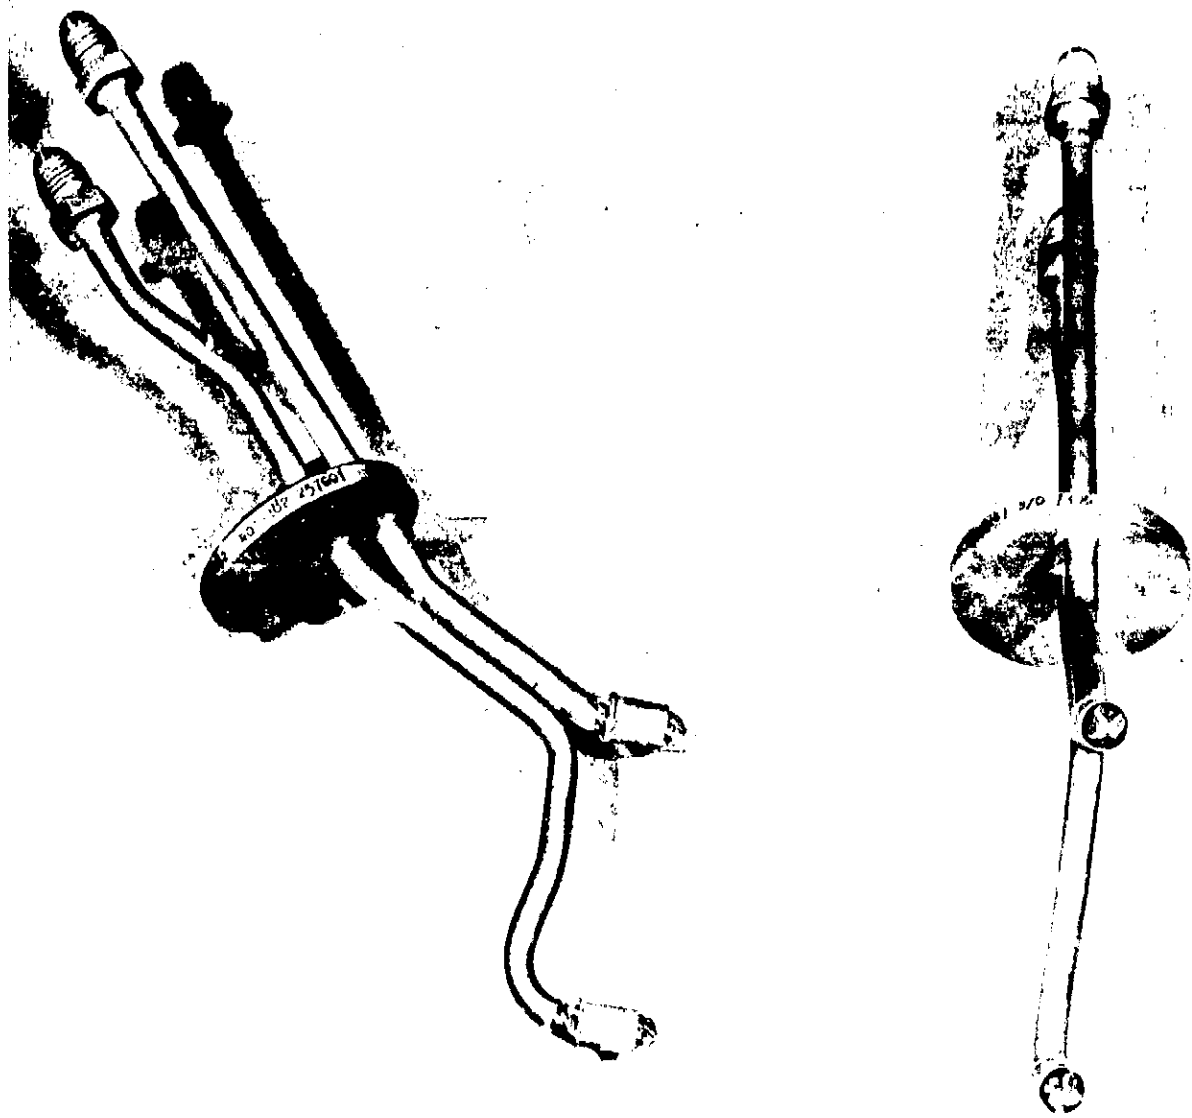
Fuel Injector Assemblies, Double Annular Combustor.
